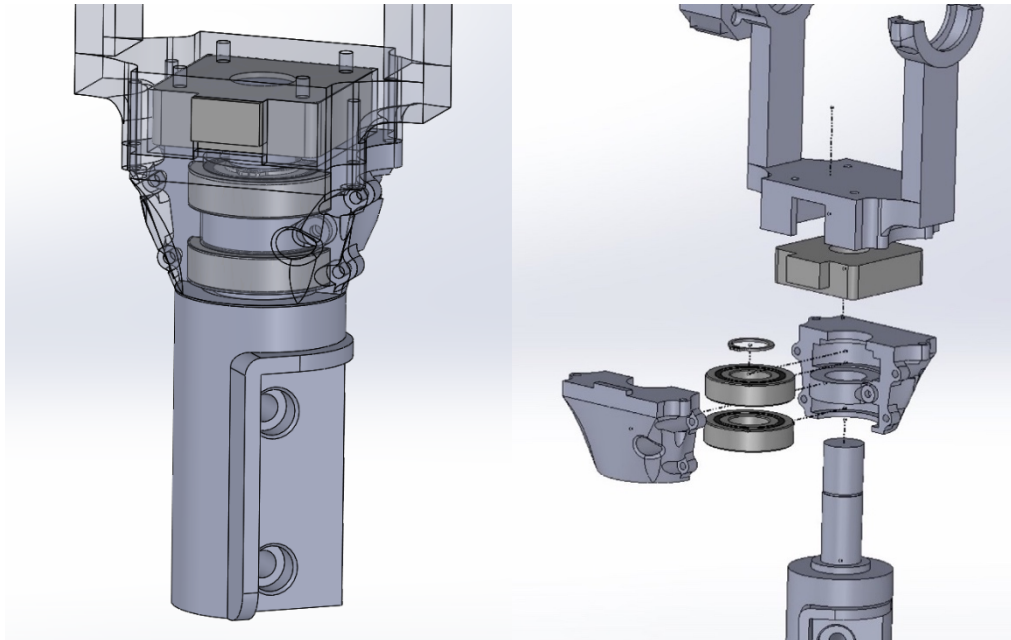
Assembled view of the pivot joint (left) and an exploded view of the pivot joint (right)
